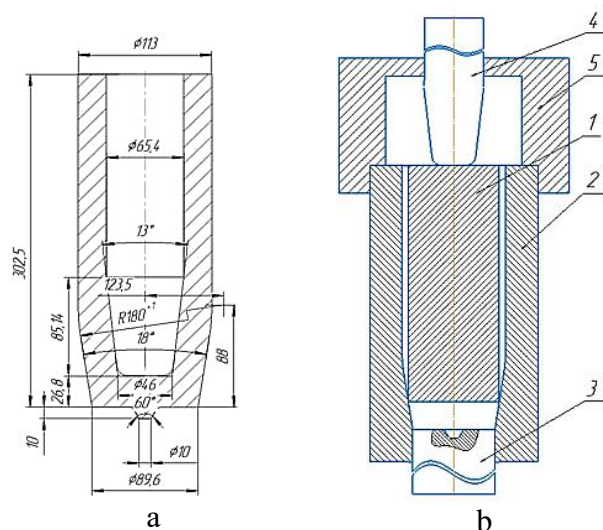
Longitudinal section of the part (a), extrusion diagram (b) – centering ring 5, punch 4, matrix 2, ejector 3, workpiece 1.
